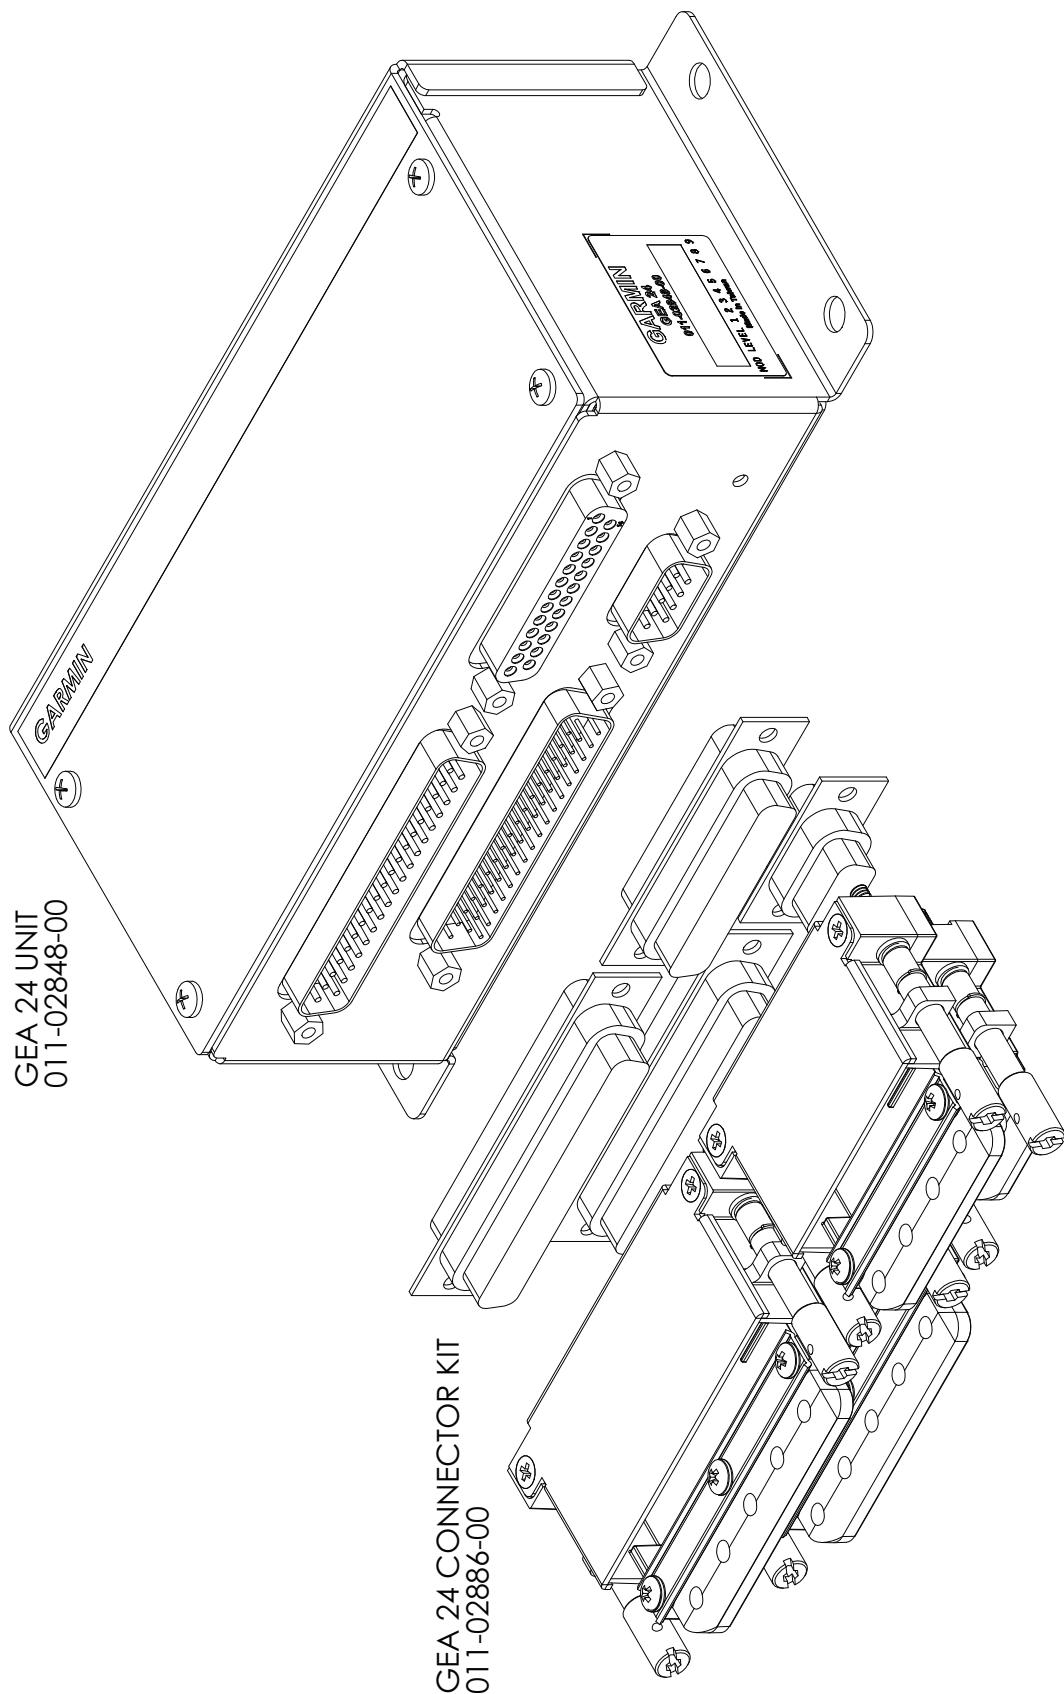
GEA 24 Assembly Drawing (no CAN terminator)
